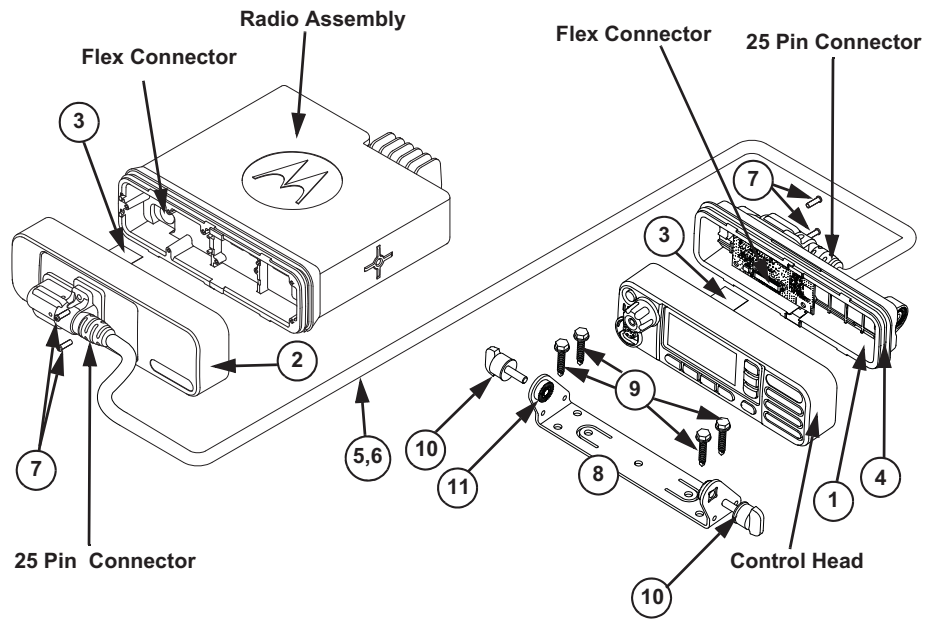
Remote Control Head Assembly and Trunnion Mounting
